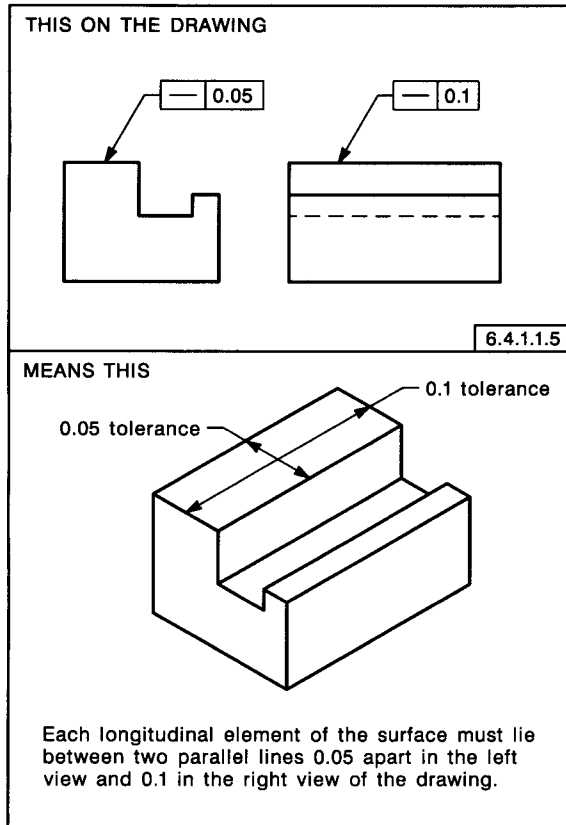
SPECIFYING STRAIGHTNESS OF FLAT SURFACES
